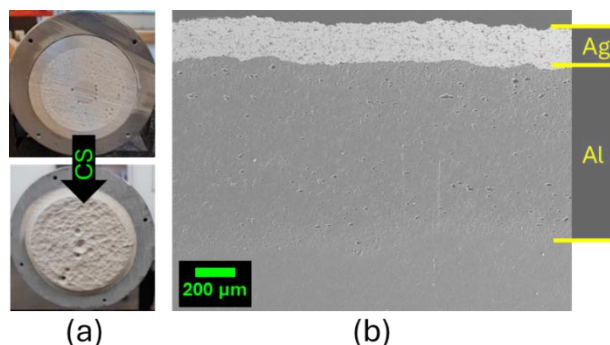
(a) Alu-Cu Connector before and after CS coating application. (b) Cross-sectional view of the CS coating.
